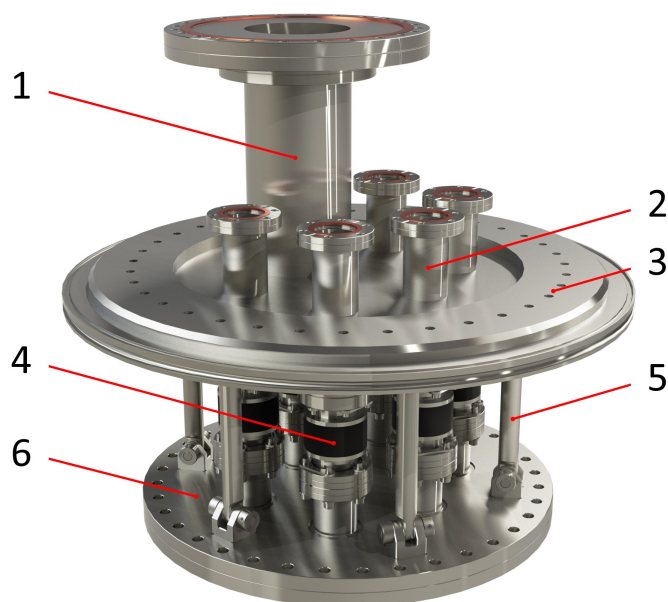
Top flange assembly of the cryostat. Legend: (1) Cooling tower feedthrough, (2) Instrumentation feedthroughs, (3) ISO-K500 flange, (4) Axial displacement bellows, (5) Swivel rods, (6) DN350CF flange. Figure from Ref. [316].
